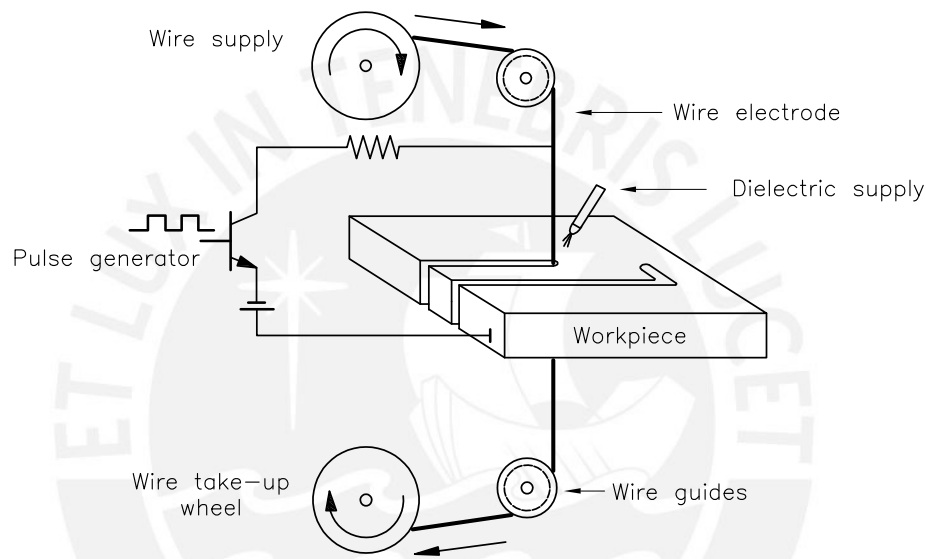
Wire electrical discharge machining. Adapted from [29].
